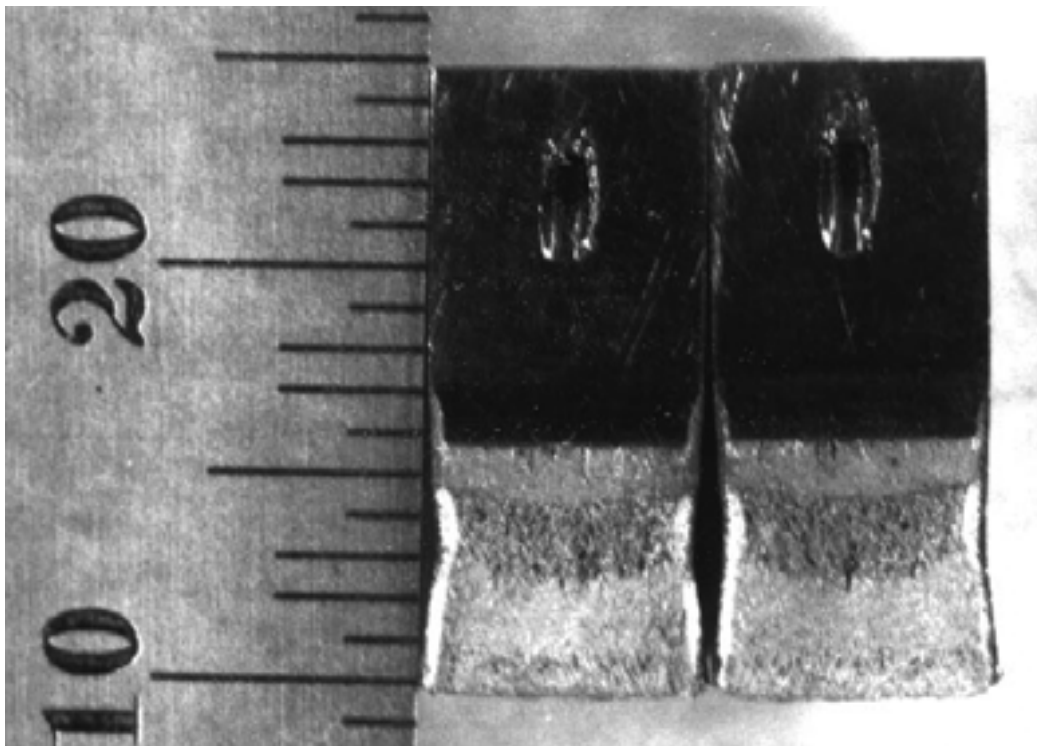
Fracture surface of specimen L2-C tested at 288°C
